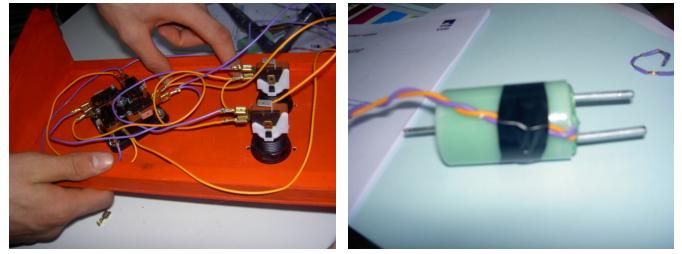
(a) Back side of the console: assembly of wire connections. (b) Wax sealed DC motor.
